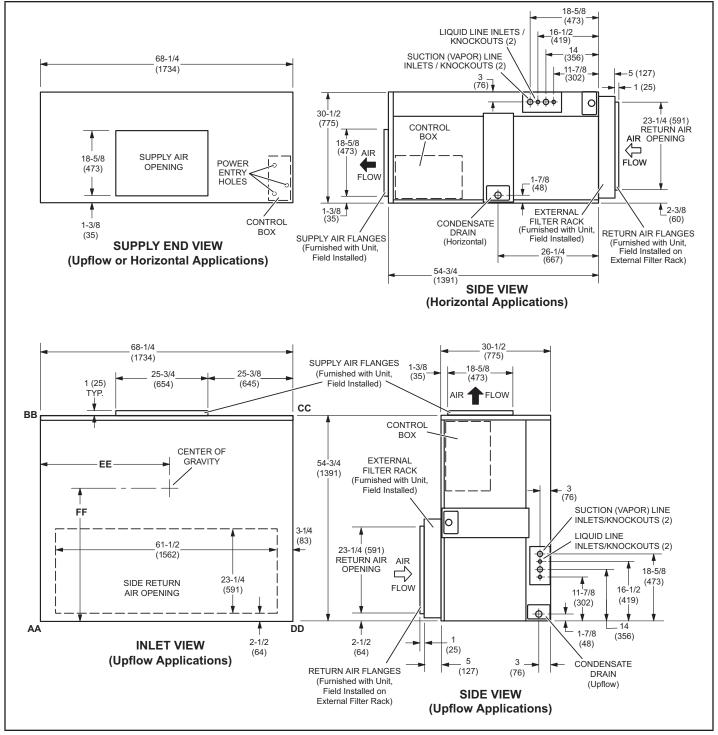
EL120-150XA and ELA 120-150 Unit Dimensions - inches (mm)
